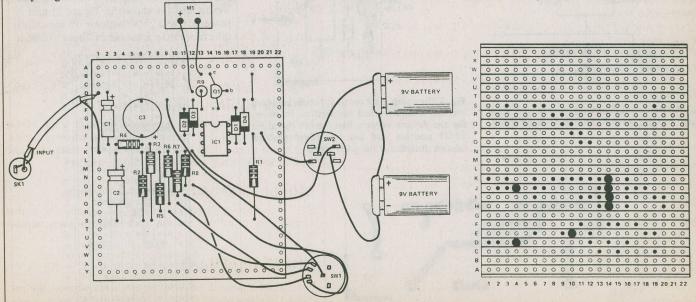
Veroboard layout of the project, showing component positions, track breaks underneath the board and connection details. Make sure you use screened cable for the input lead then mount the board and meter in a suitable case.
